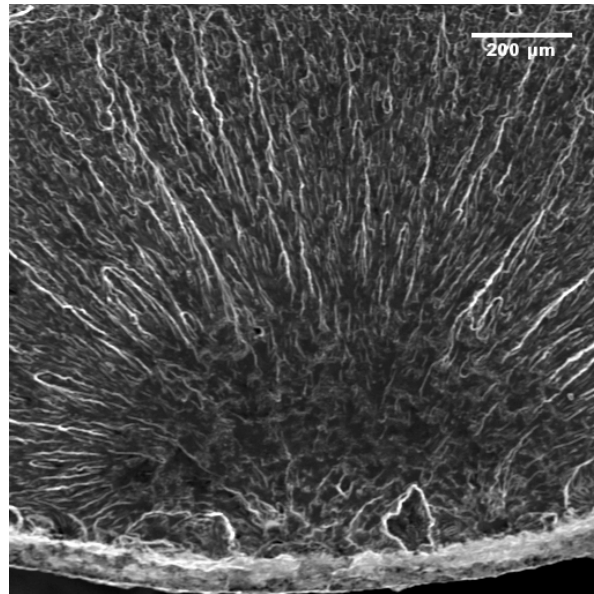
Fracture surface of axial fatigue specimen. Al 7050 T7451 WC 17 % coated by HVOF process.
